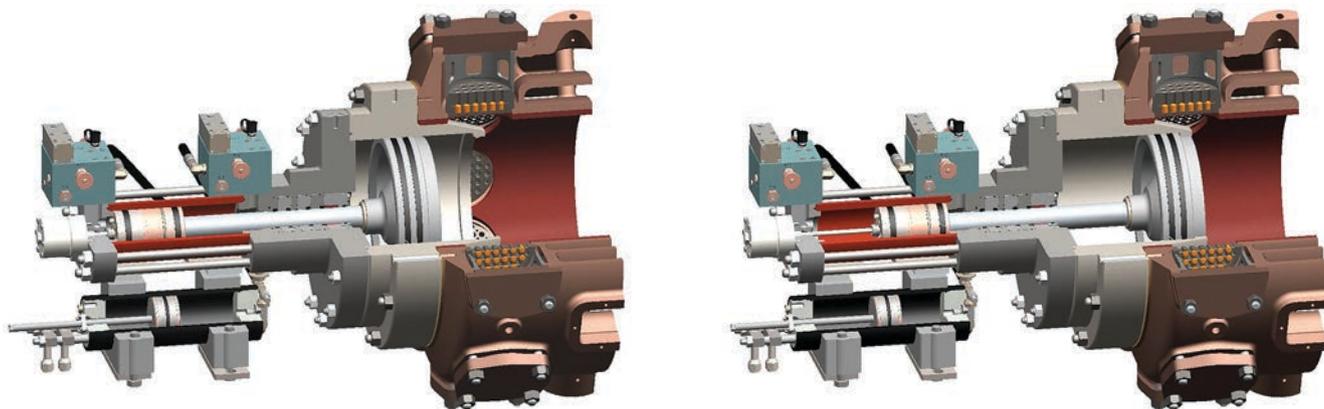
Cutaway view of an HVVCP showing the HVVCP piston retracted (left) and extended (right). It is capable of remote control and, if connected to a PLC, automated control.
